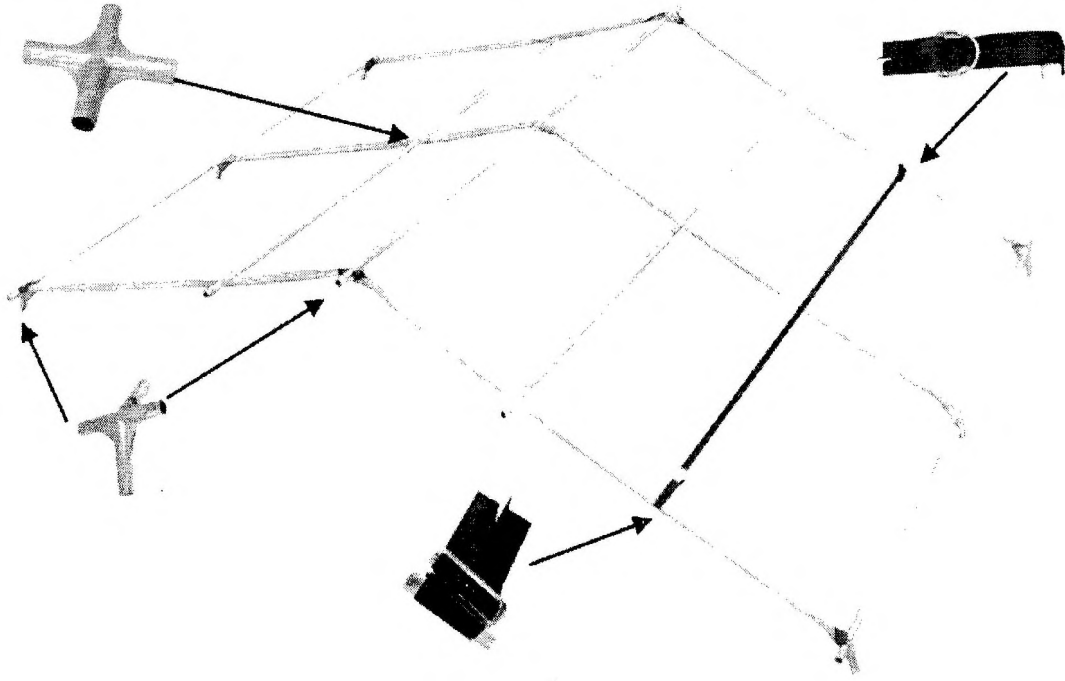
Complete Roof Section (Only half of the frame shown for clarity)
